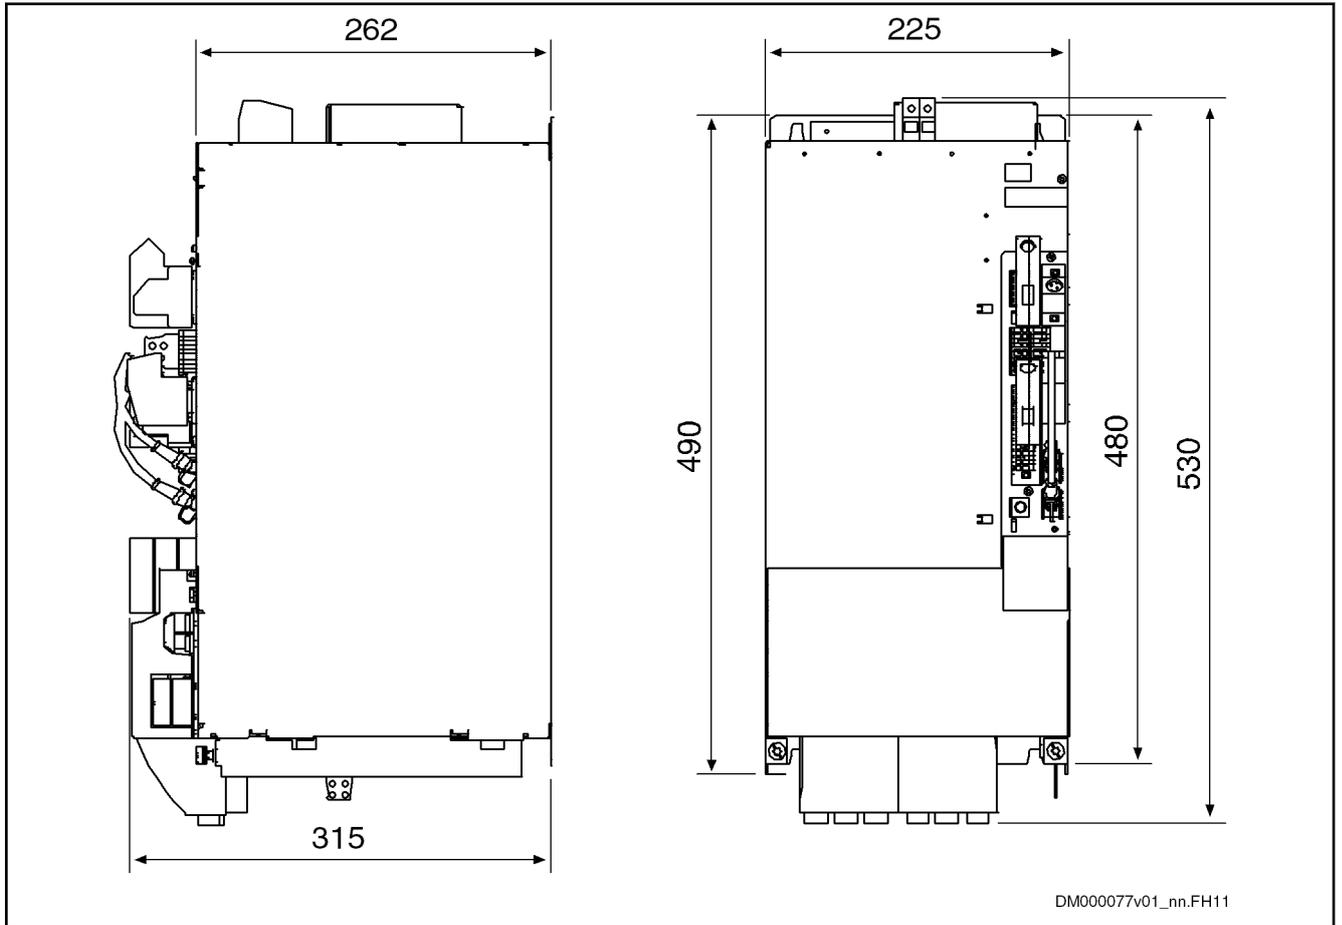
Dimensional drawing HCS03.1E-W0100 and HCS03.1E-W150
